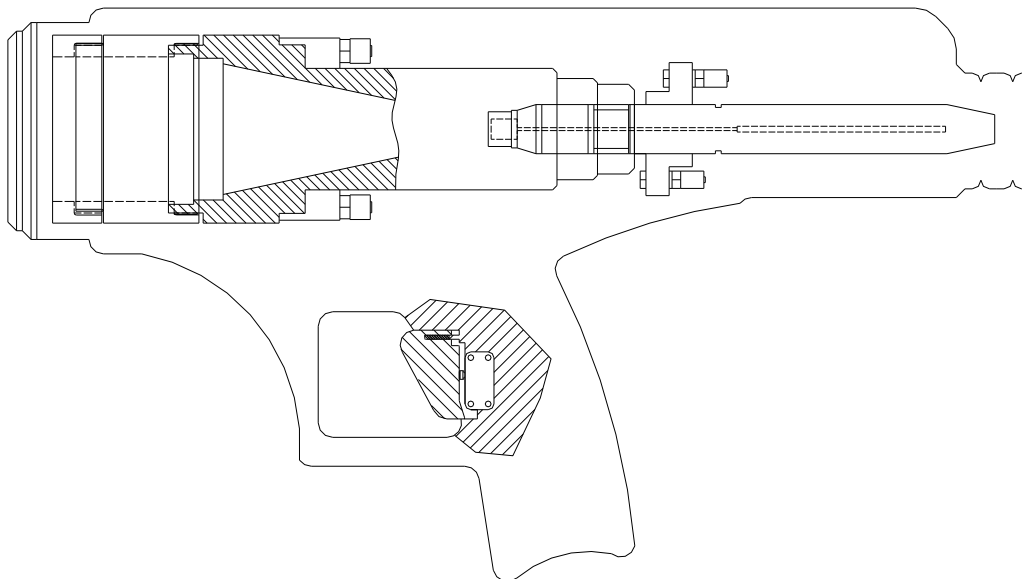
Cross-section of a “pistol” model layout of a handheld laser tool. The location of the optical fiber, the focusing system and the button for controlling the laser radiation is shown.
